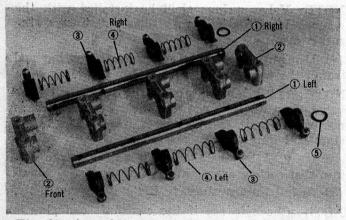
Assembling the Rocker Arm Shaft Assembly
